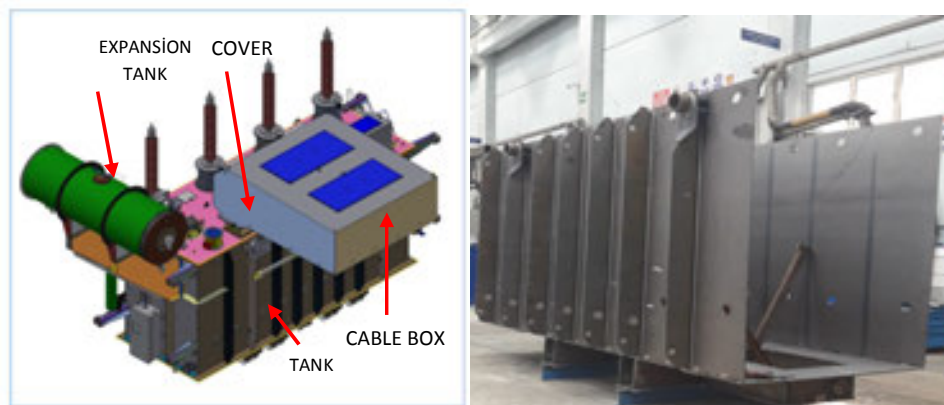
(a) Main construction of power transformer tank, (b) Pre-assembling of finished side walls on to the hull.
